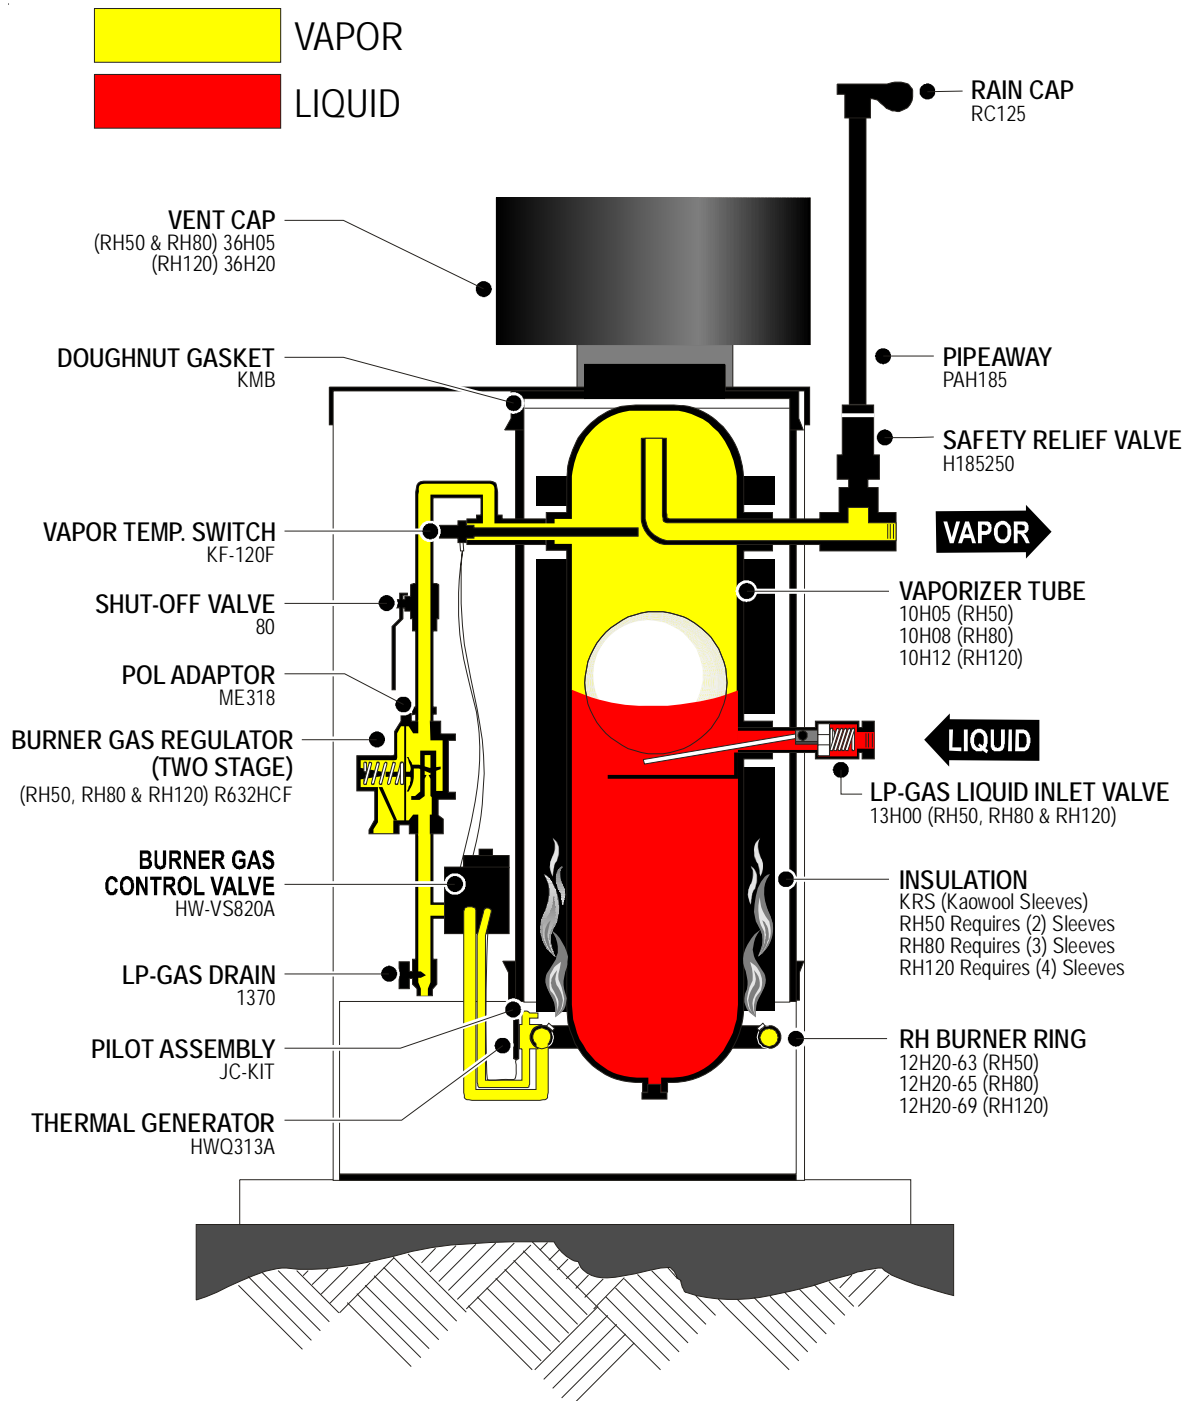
RH50, RH80 & RH 120 Cutaway Drawing
